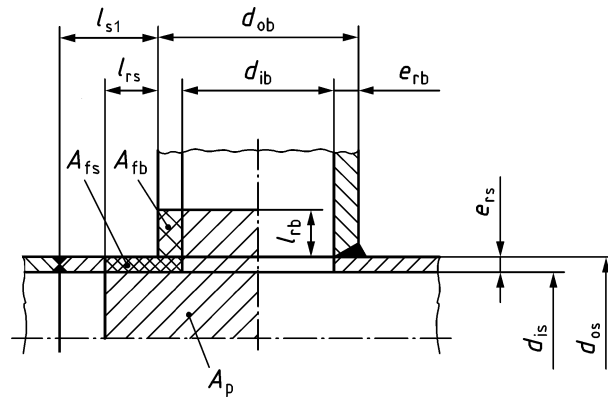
Cylindrical shell with fillet welded branch (no additional reinforcement)
